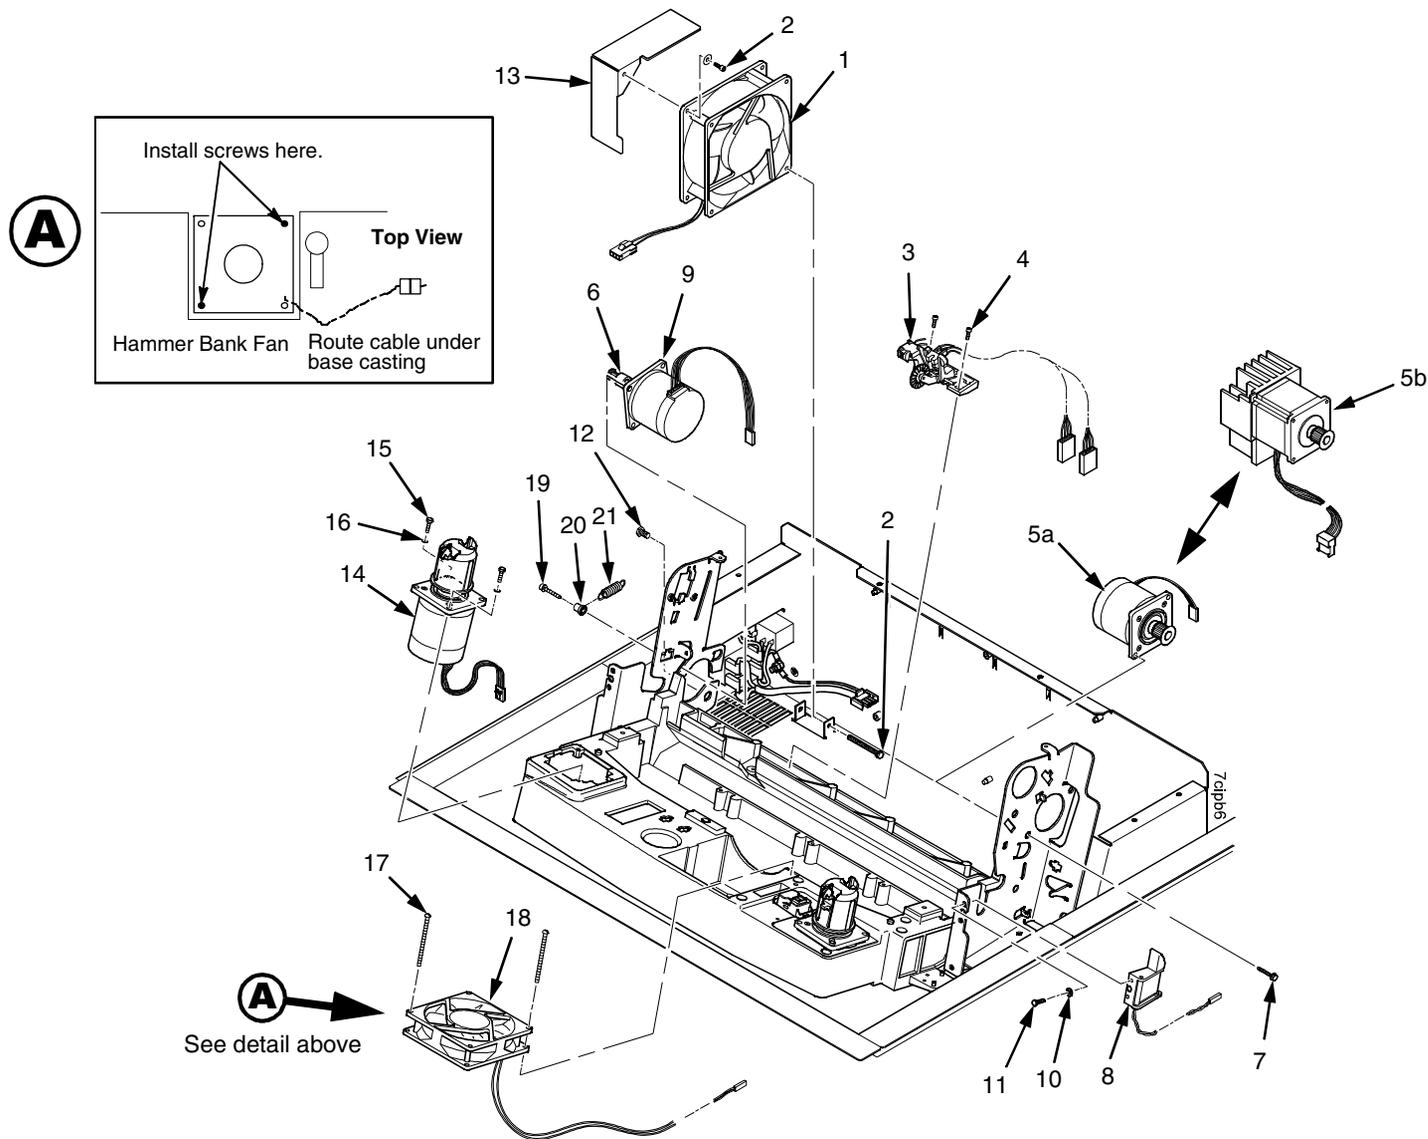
This illustrated parts breakdown shows the motors, cooling fans, and the paper detector switch.
